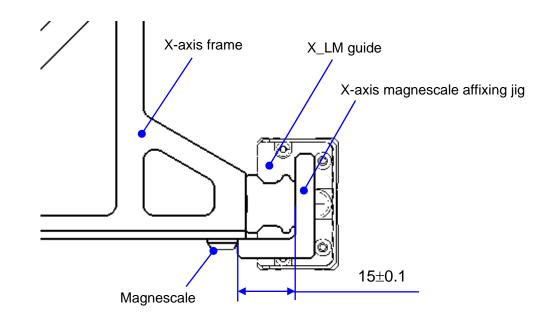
Example of X_MSC Install Jig Mounting
